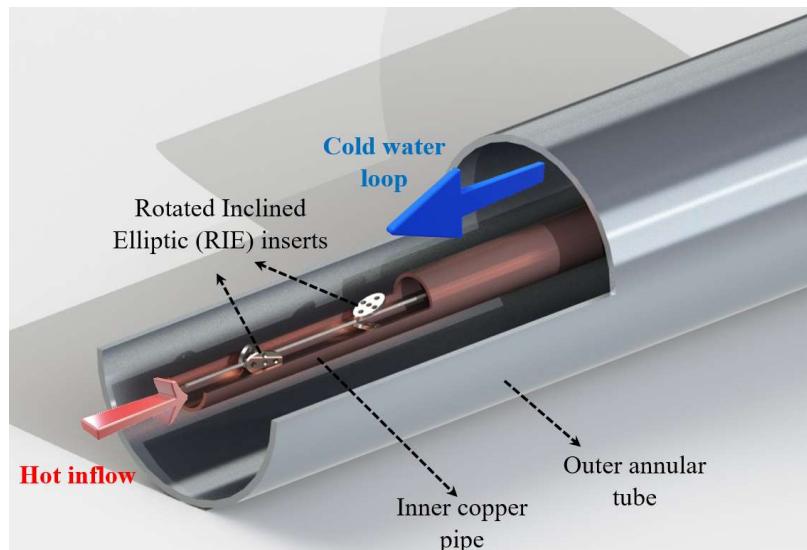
Detailed view of the double-pipe heat exchanger test section equipped with the RIE inserts.
